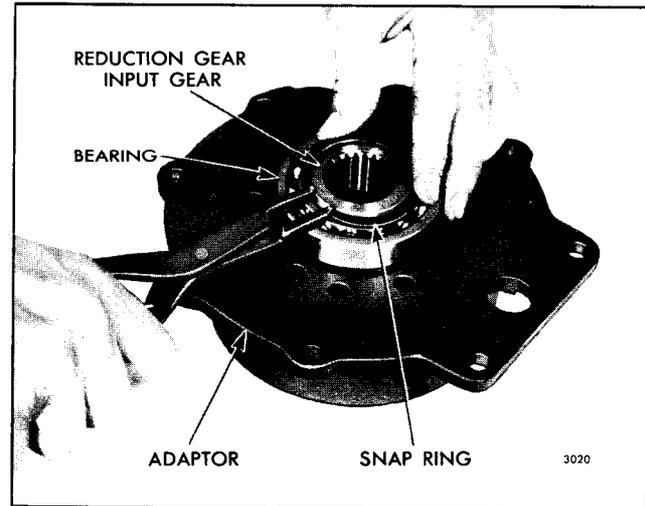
Removing or Installing Reduction Gear Input Gear Bearing Snap Ring (1.5:1 Ratio)
